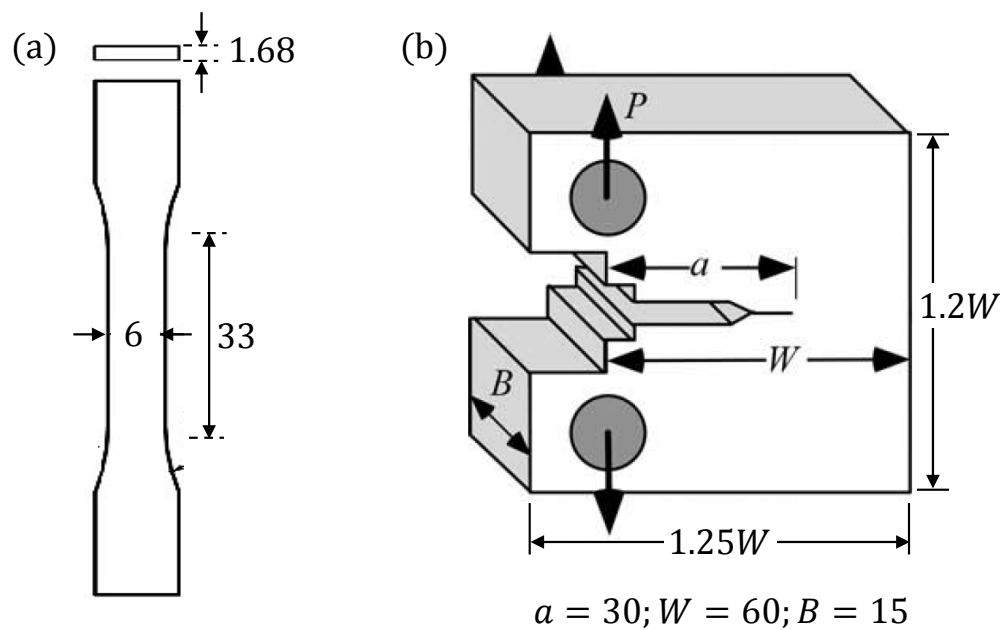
Specimens used to measure the material properties of the 3d printed polymer: (a) dogbone specimen for tensile tests and (b) CT sample for fracture toughness tests. All dimensions are in mm.
